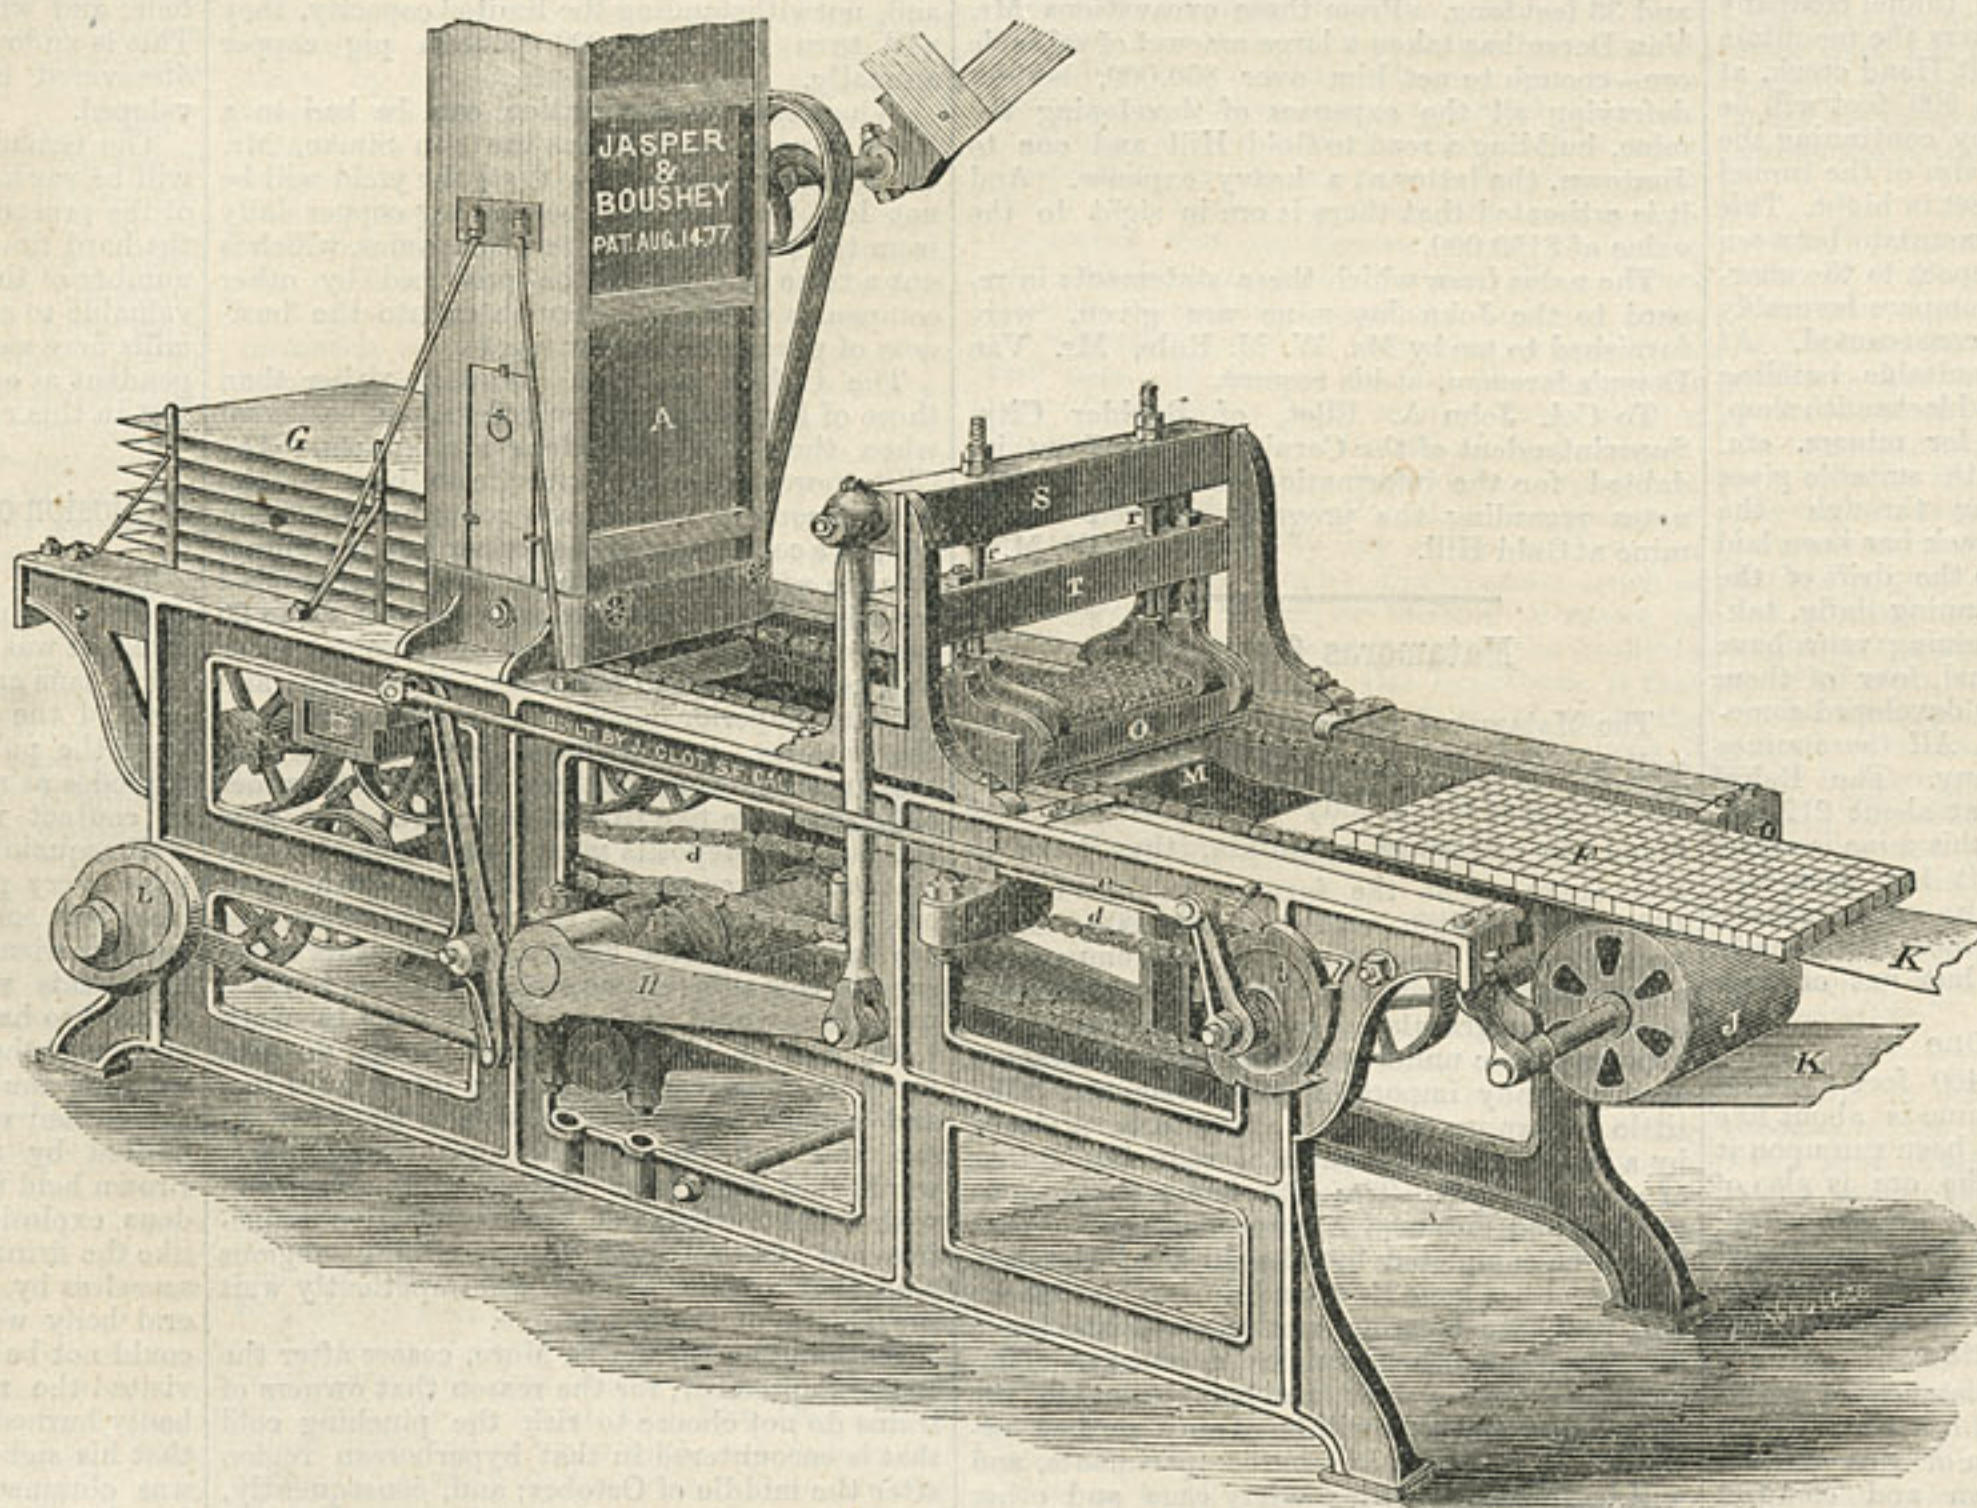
, JASPER & BOUSHEY'S IMPROVED MACHINE FOR MANUFACTURING CUBE SUGAR.
